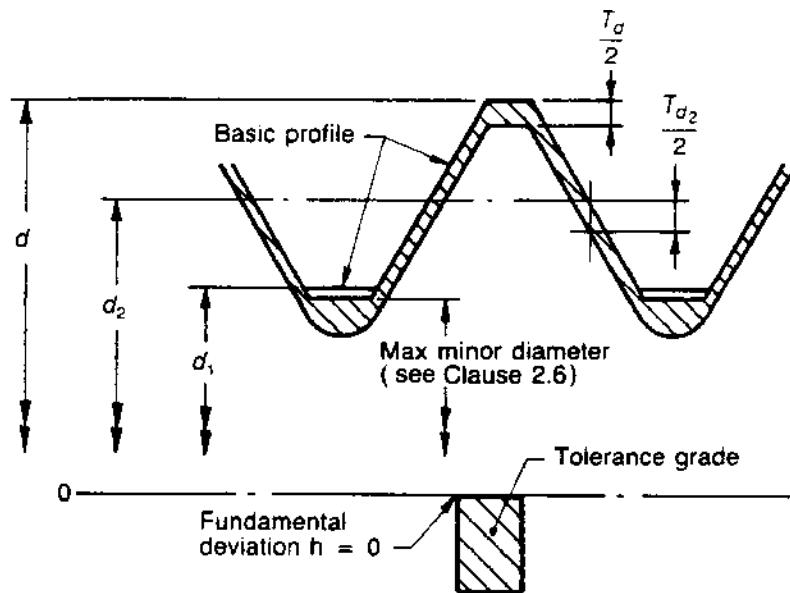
LIMITING PROFILES FOR EXTERNAL THREADS — TOLERANCE POSITION h
